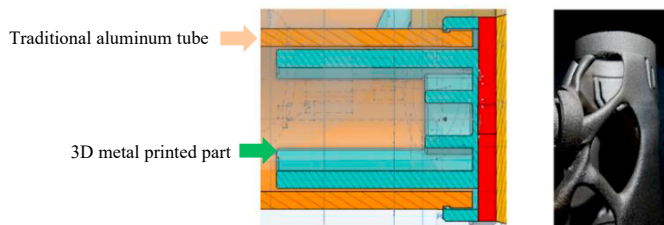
Design of the interlocking in a Head-tube of a bicycle; the grooves are intended for assembly interlocking the aluminum tubing with the printed parts.
